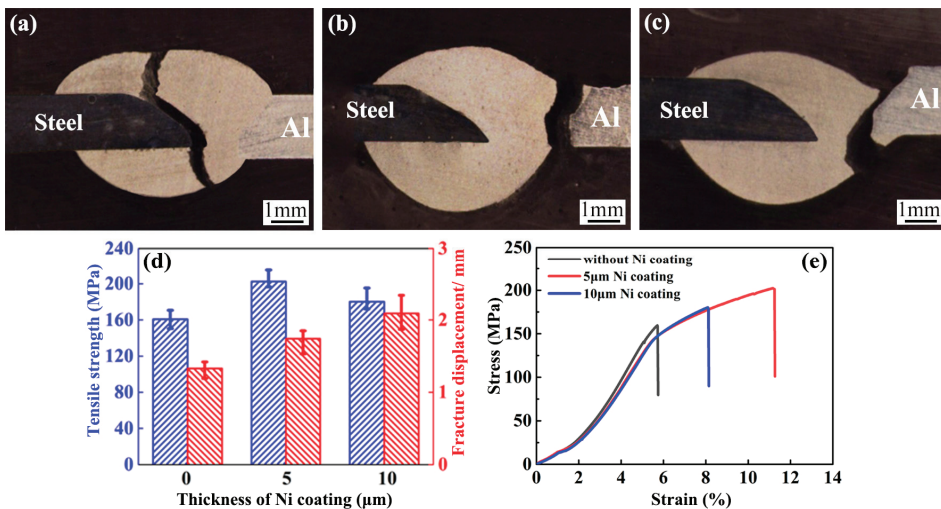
Tensile properties and fracture section morphology of joints: (a) fracture location without Ni coating; (b) fracture location with 5 μm Ni coating; (c) fracture location with 10 μm Ni coating; (d) tensile strength and fracture displacement; (e) stress-strain curves.
